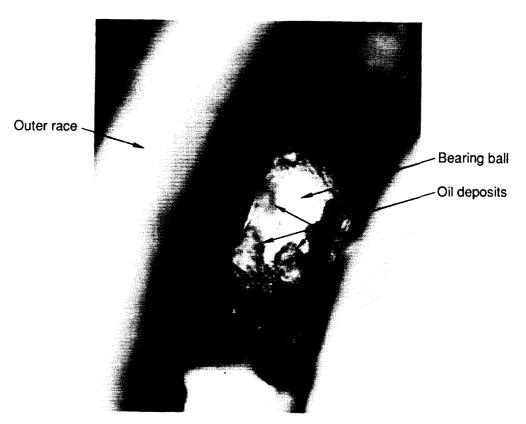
MACRO PHOTOGRAPH OF 9.5 mm BEARING FOLLOWING TEST
